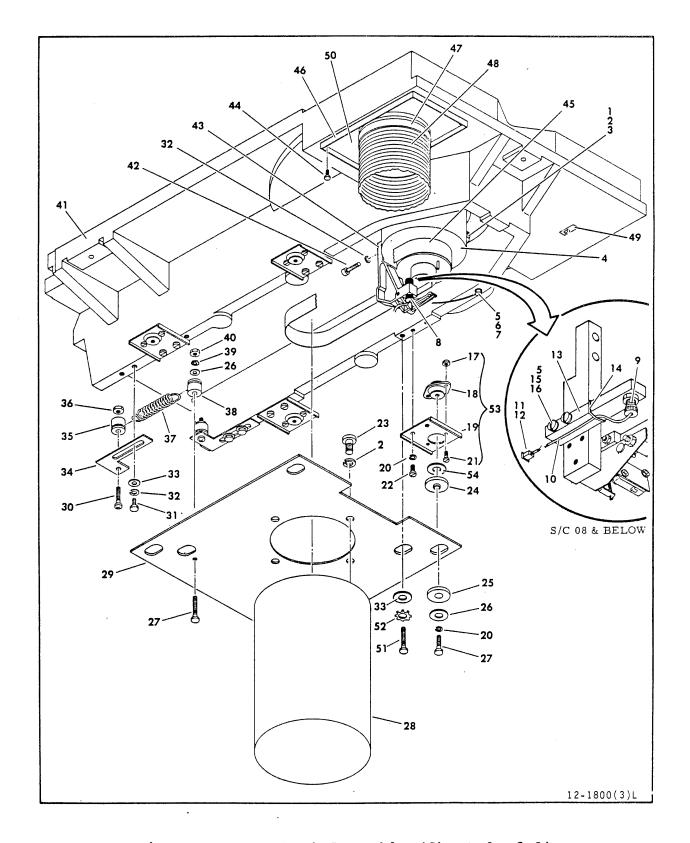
A-20. Deck Assembly (Sheet 3 of 3)
